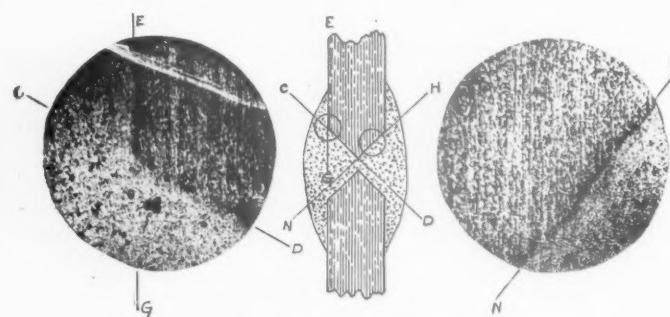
Sections of a Weld Made with 125 Amperes
